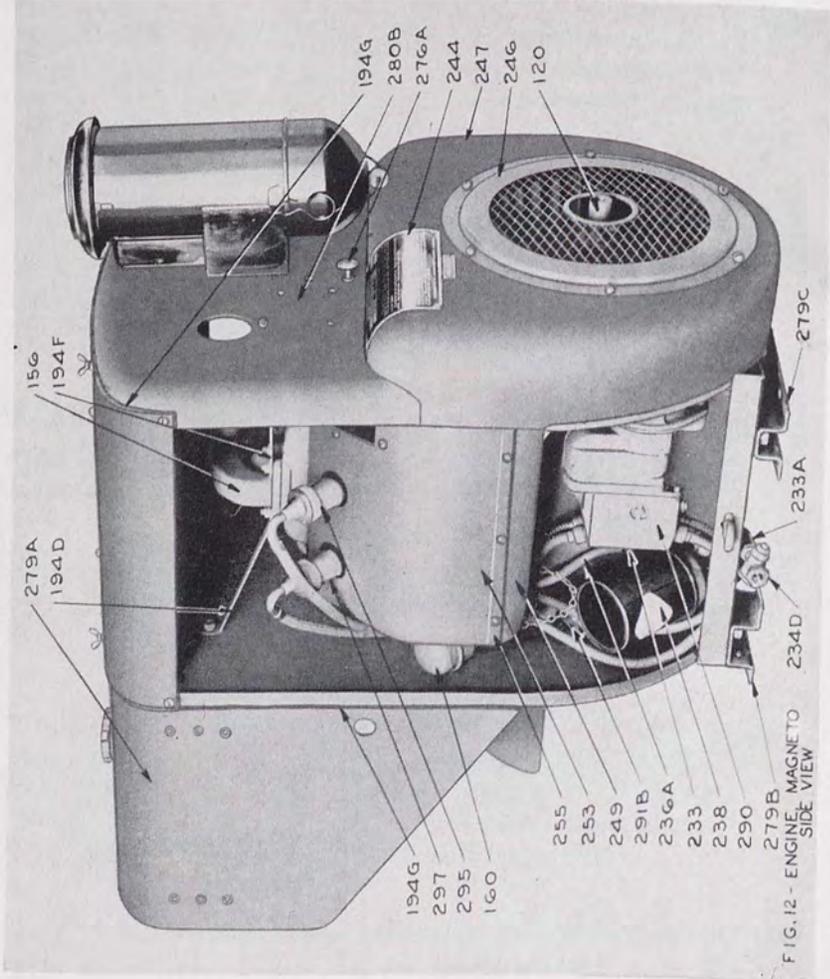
ENGINE, MAGNETO SIDE VIEW
